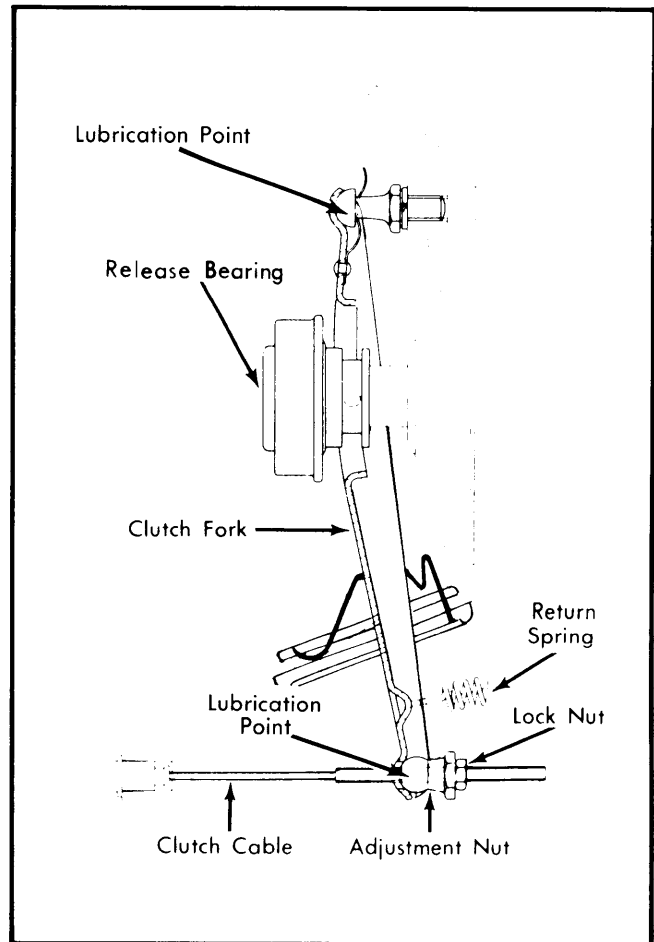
Clutch Actuating Components Showing Cable Adjustment Point
